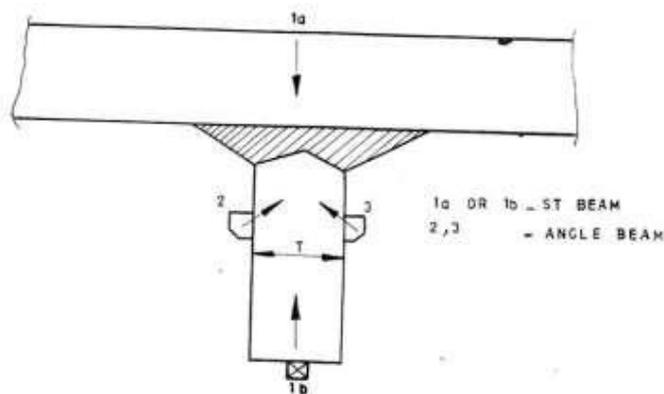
SCANNING DIRECTION FOR 'T' WELDS (ATTACHMENT)
